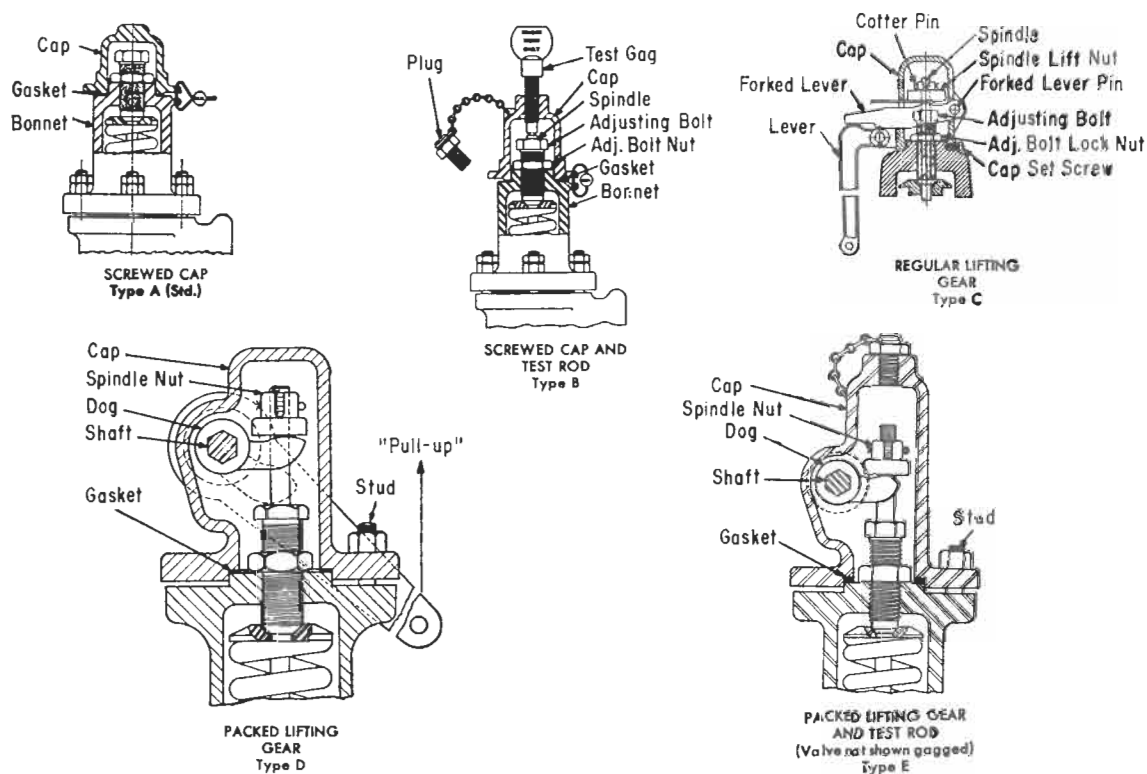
B. Accessories for all types of safety relieving valves. Courtesy of Crosby-Ashton Valve Co.
